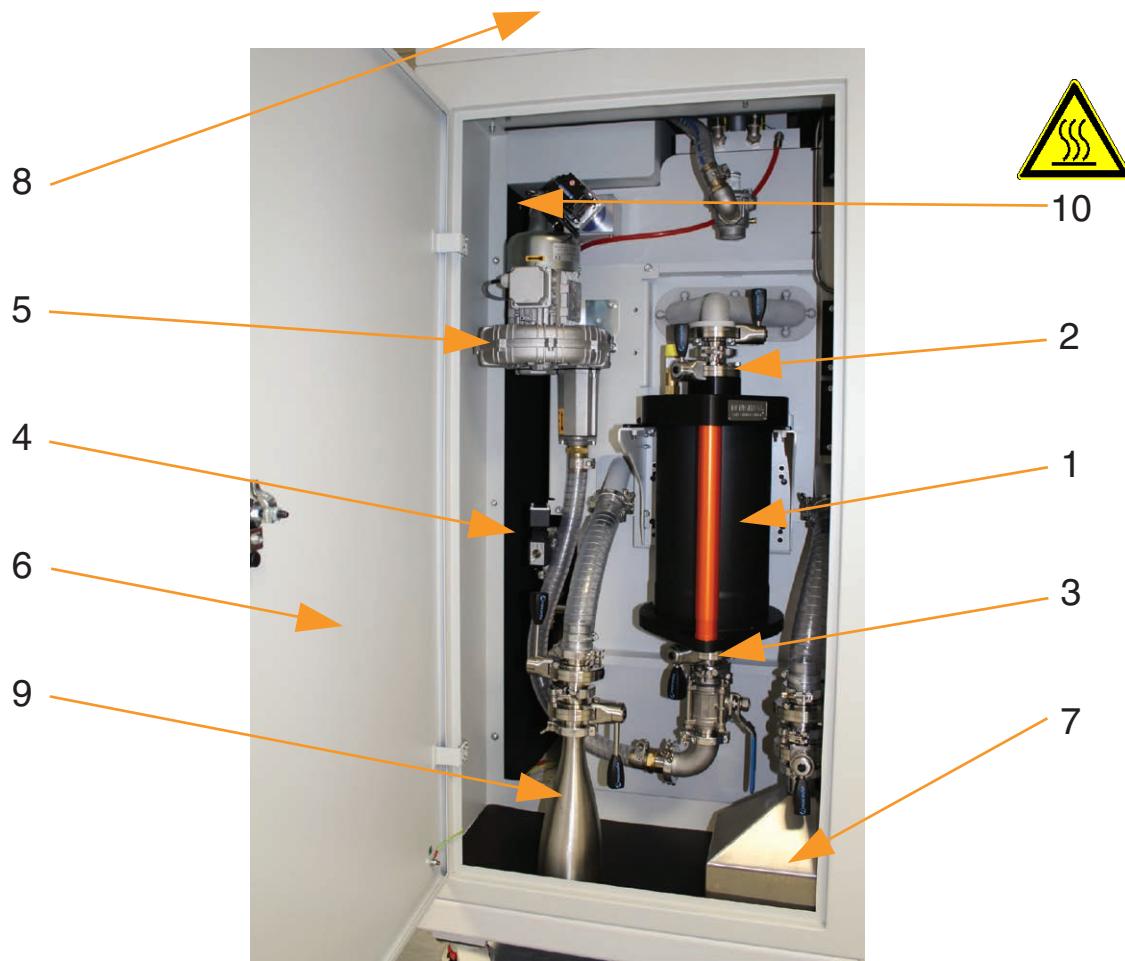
Left hand user access door AM250/AM400 with large safe change filter
